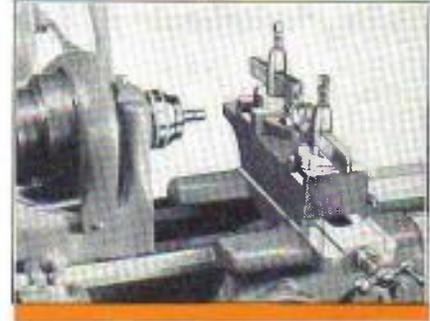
Screw Feed Double Tool Slide. Price includes one Tool Post, Ring and Wedge, but no Tool Holder. Cat. No. 958. "Bemor". Wt. 18 lbs. \$35.00
